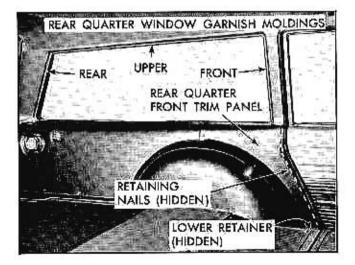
Rear Quarter Trim Assembly—Station Wagon
